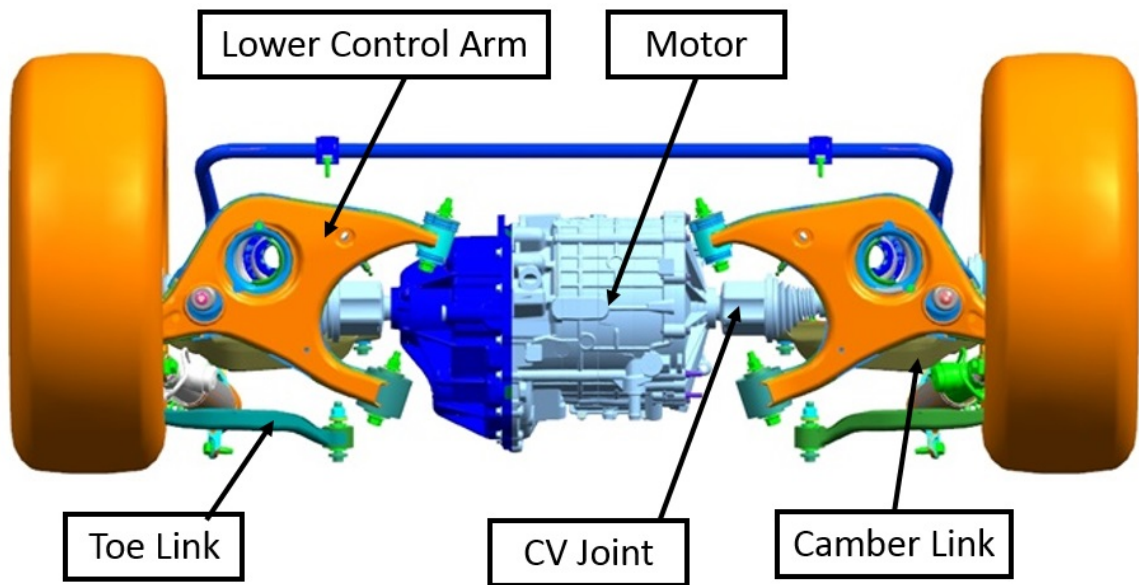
BareBones view of Buick LaCrosse AWD rear suspension with motor in place - bottom view.
